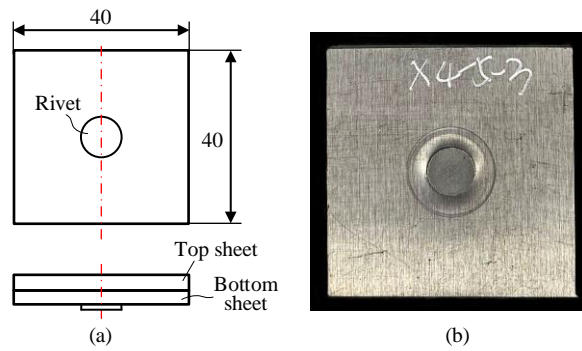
Specimens dimensions of the SPR joints (in mm)
